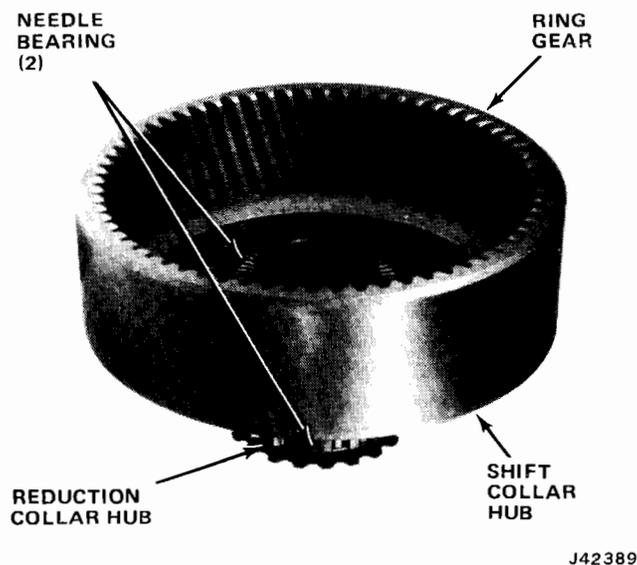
Ring Gear Assembled on Reduction Collar Hub
